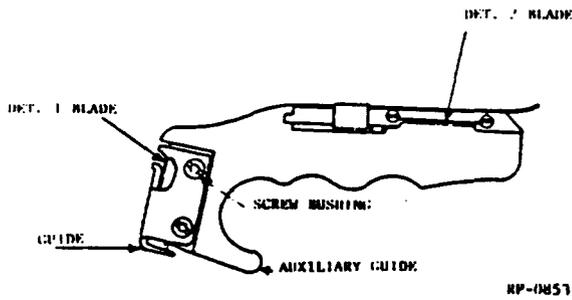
R-4366 CABLE BUTT AND STRIP TOOL (PAR. 4.31)
